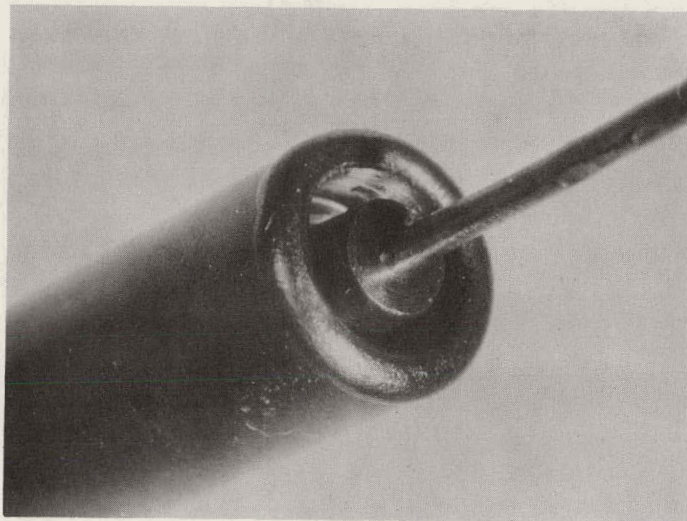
Typical Trepan Cup Cap End Closure Weld
